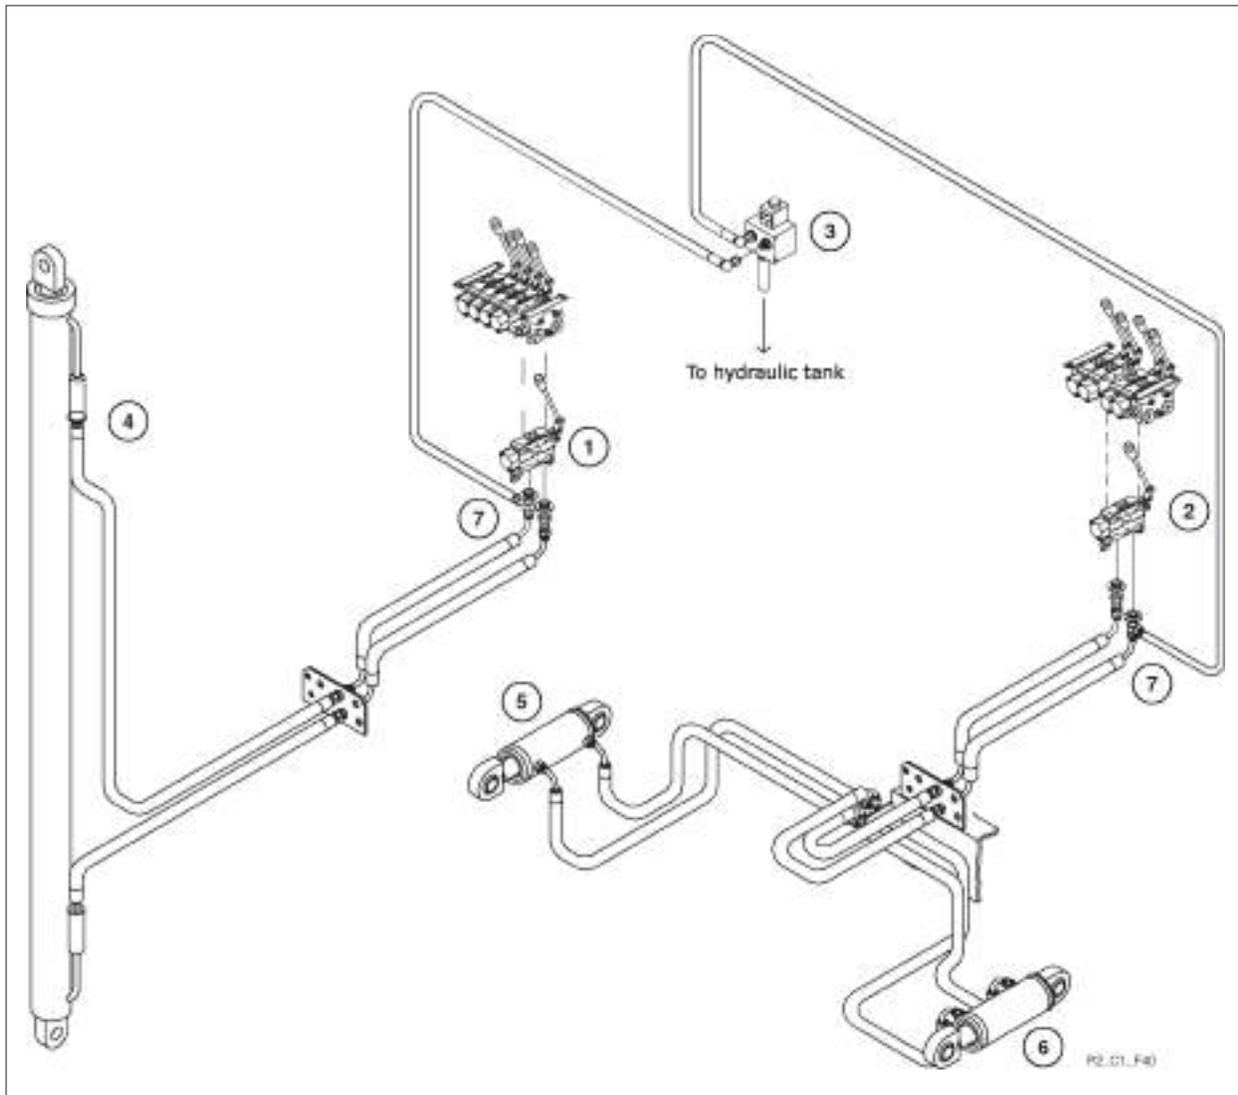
A. M8 / M50 LOWER AND GO HYDRAULIC SYSTEM COMPONENT LAYOUT
